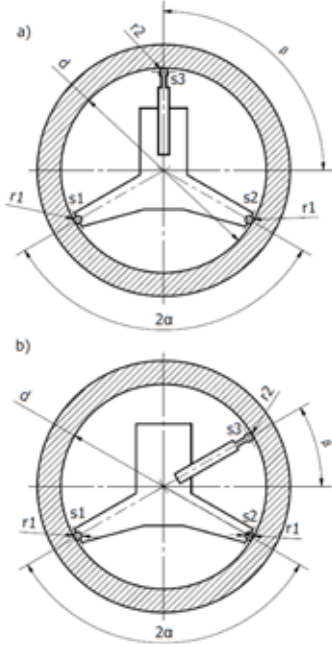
The geometry of the head for v-block method measurement. s1, s2 – base points, s3 – measurement point, α , β – parameters of the method, r1, r1 – contact measuring tip radius, r2 – measuring probe tip radius, d – diameter of measured detail.
